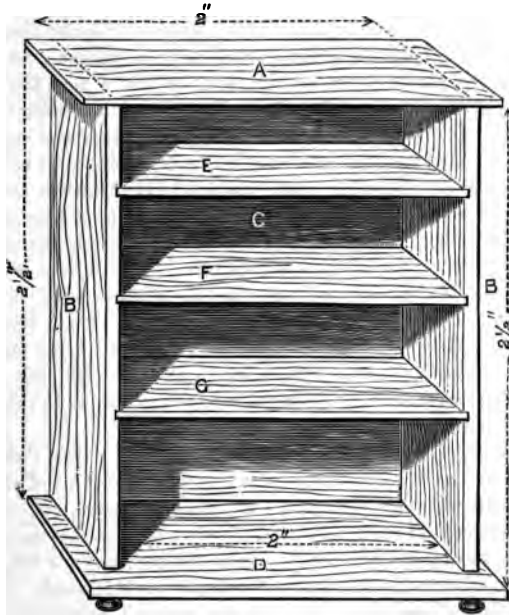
SECTIONAL VIEW OF CHEST OF DRAWERS.
